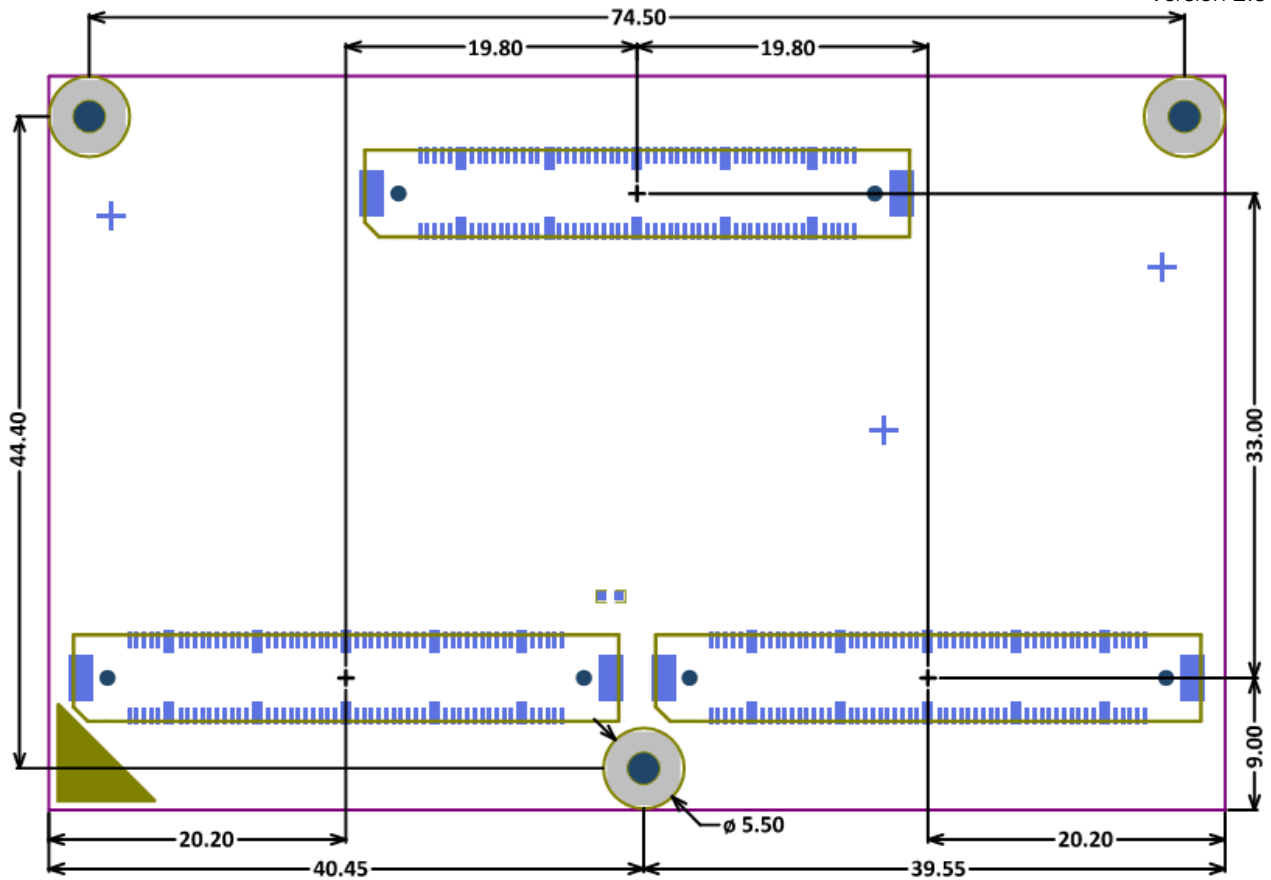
Mechanical outline and Bottom Connectors (bottom view)
